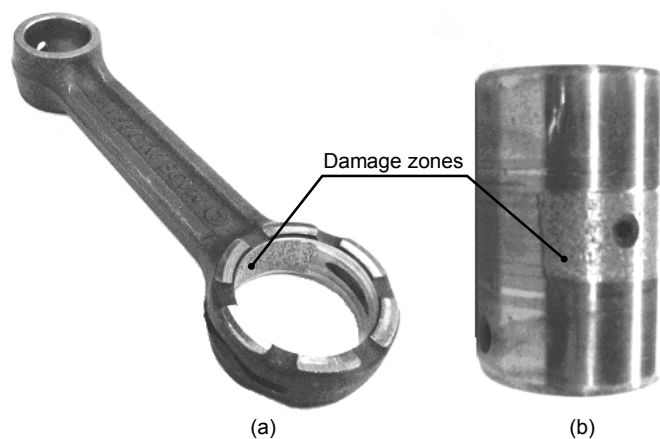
Failure components: (a) Connecting rod; (b) Pin.
